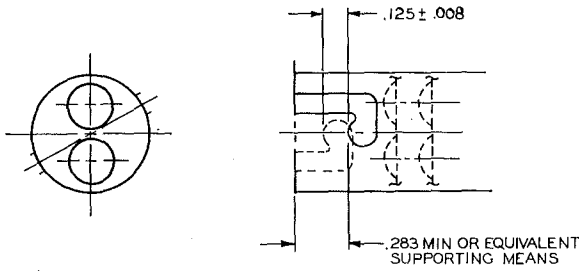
SOCKET FOR BULB BASE C-2<sup>1</sup>
